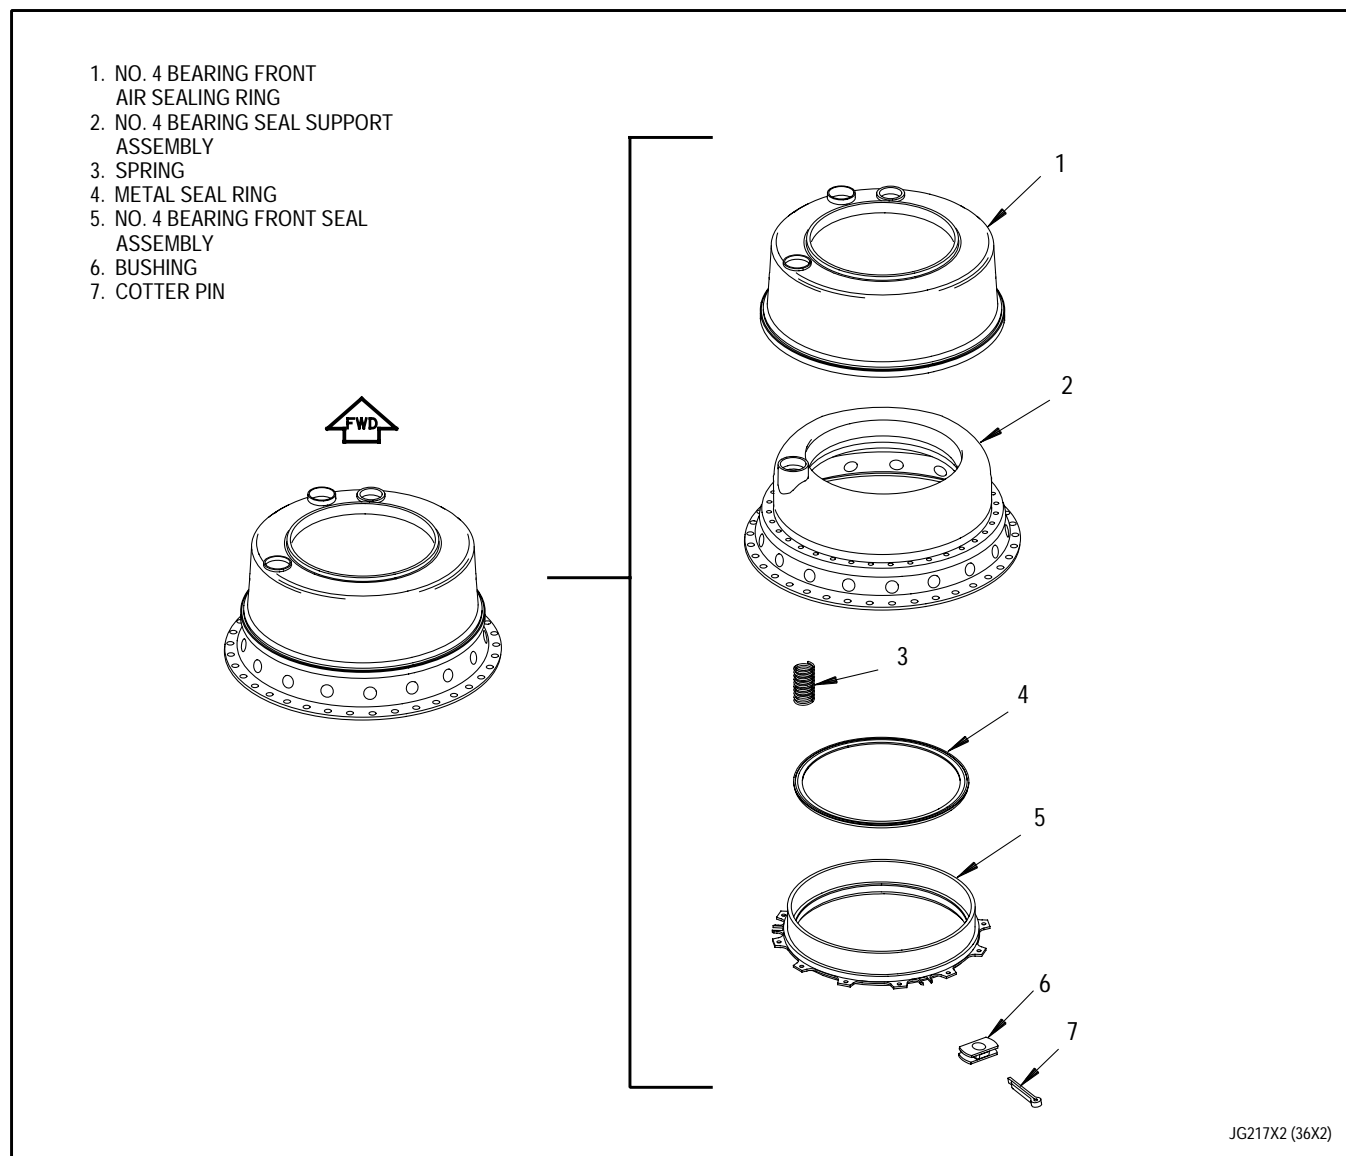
No. 4 Bearing Front Seal Support, Front Seal Assembly and Front Air Sealing Ring - Disassembly
